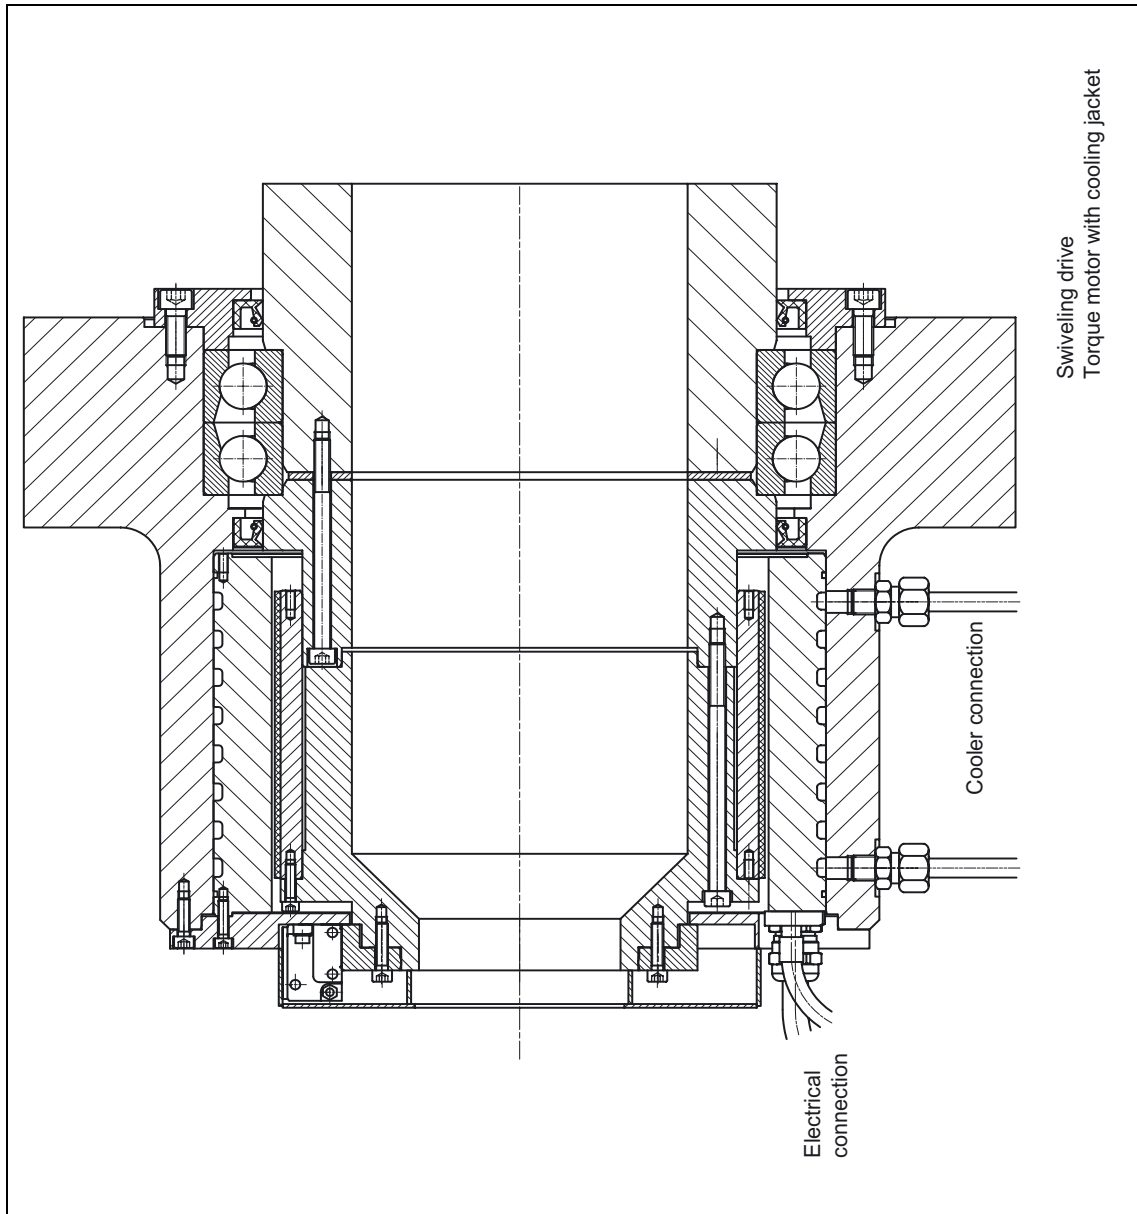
Swiveling drive using a torque motor with cooling jacket
